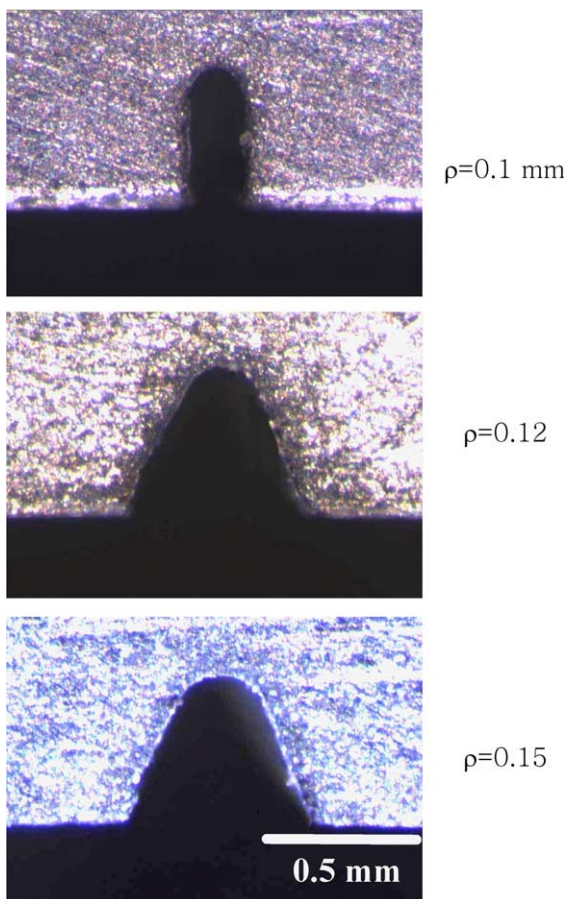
Cantilever beam specimens with the notch tip radius, ρ ranging from 0.1 to 0.15mm.
